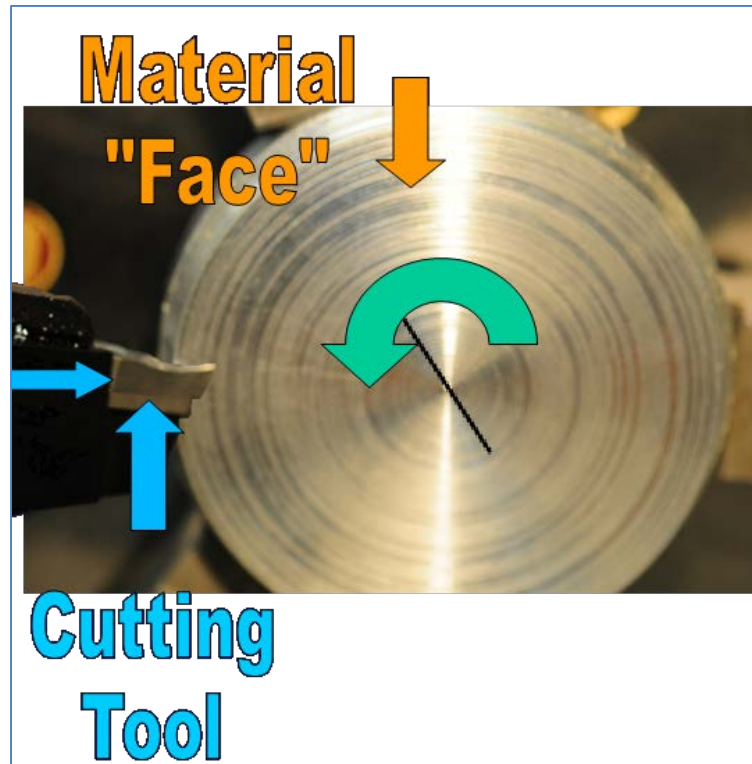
Illustration of direction of cutting tool and rotating workpiece during traditional turning process.
